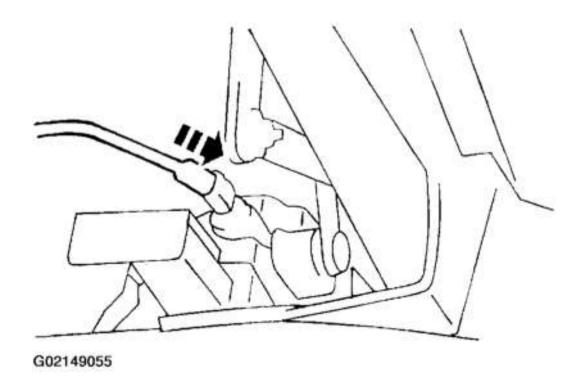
Connecting 4WD Indicator Switch Electrical Connector
